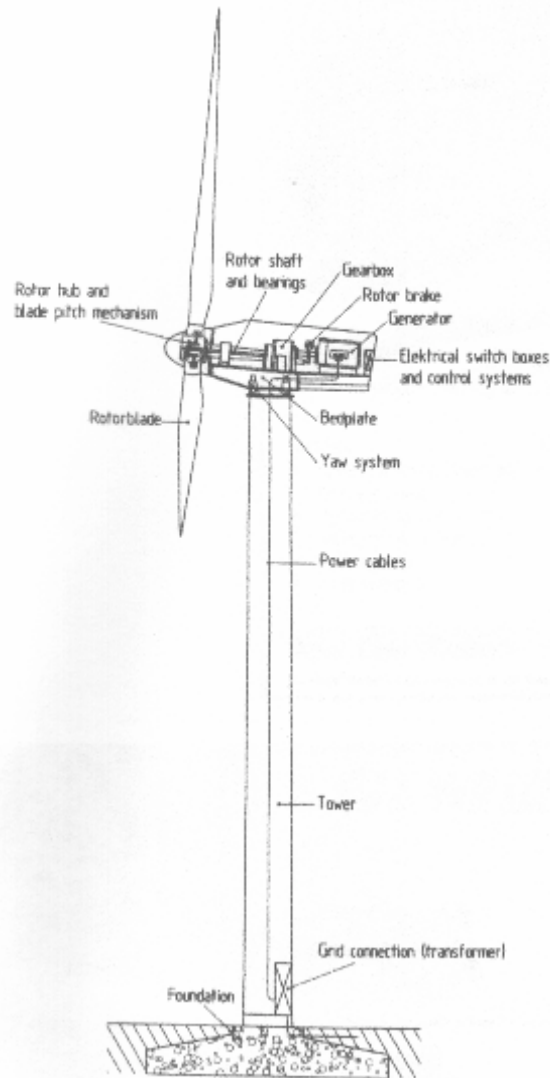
Schematic drawing of a horizontal axis wind turbine generator.
